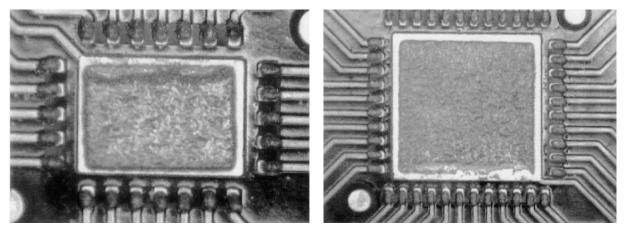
Solder Paste Printing of LLP 24 and LLP 44 Using 127 µm (5 mil) Thick Stencil
